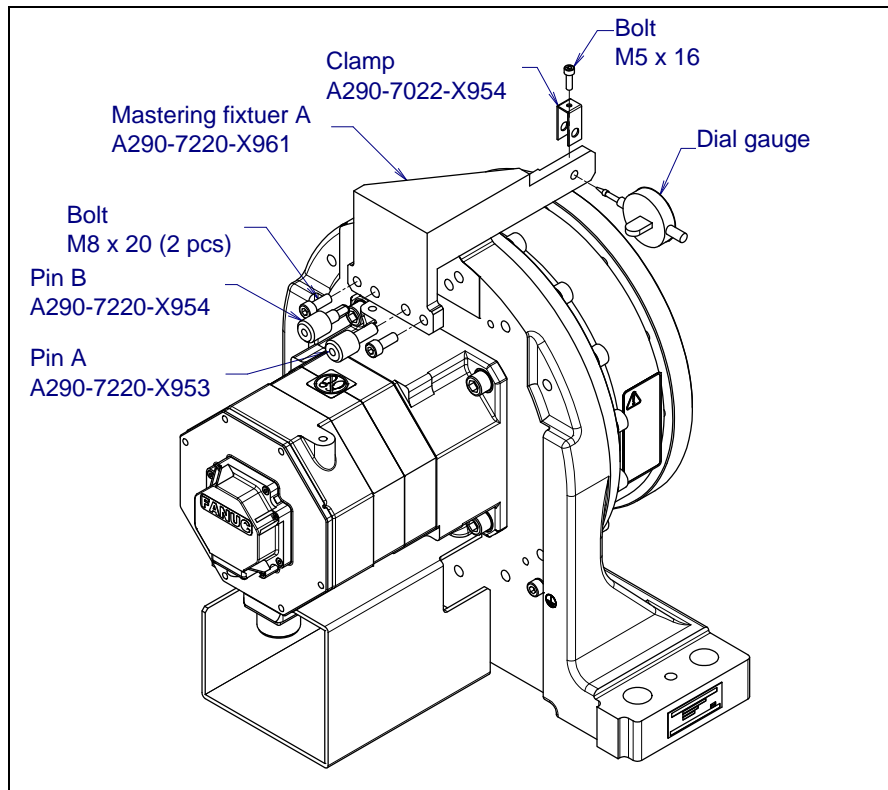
(f) Attaching the mastering fixture to the 1-axis positioner (1000kg/1500kg payload (Compact type))
